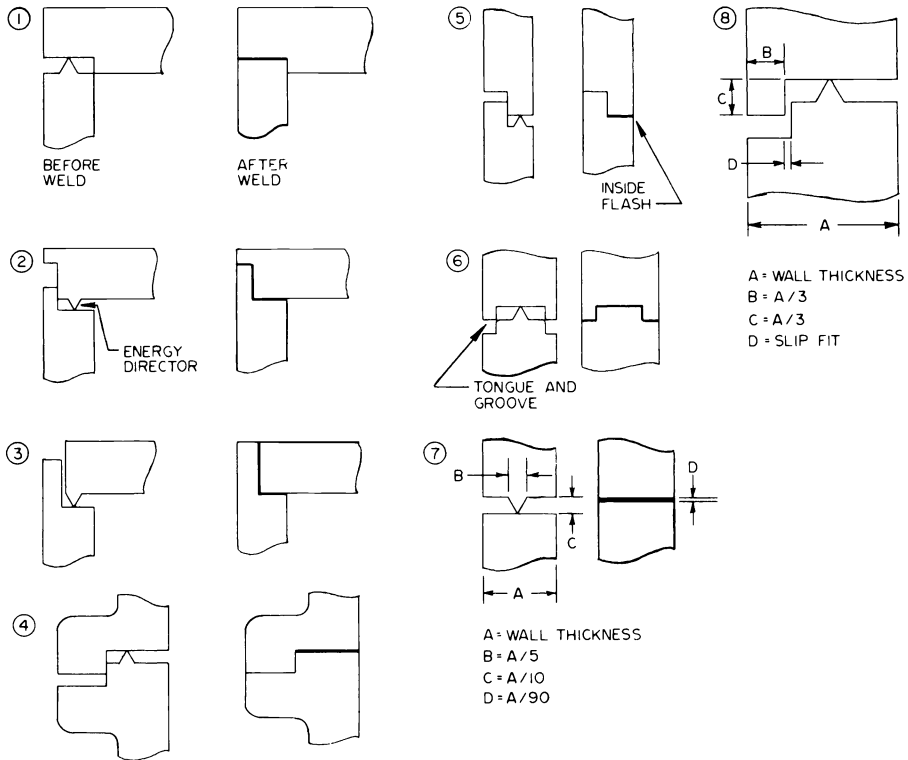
Common joint designs for ultrasonic welding.
